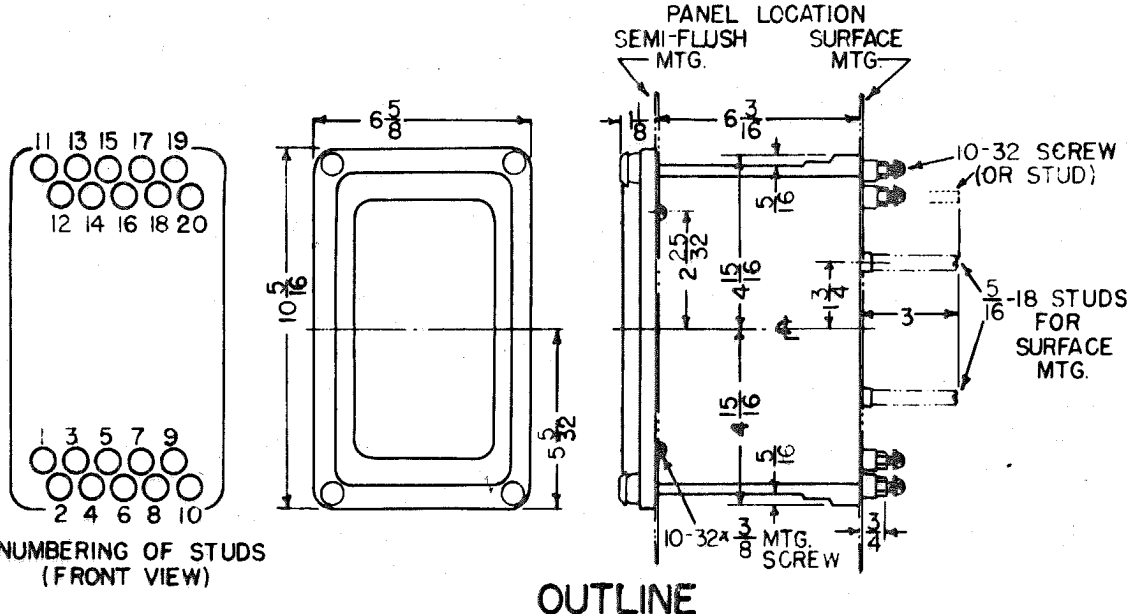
Outline And Panel Drilling Dimensions For Relay Types RCV11A And RCV11B
